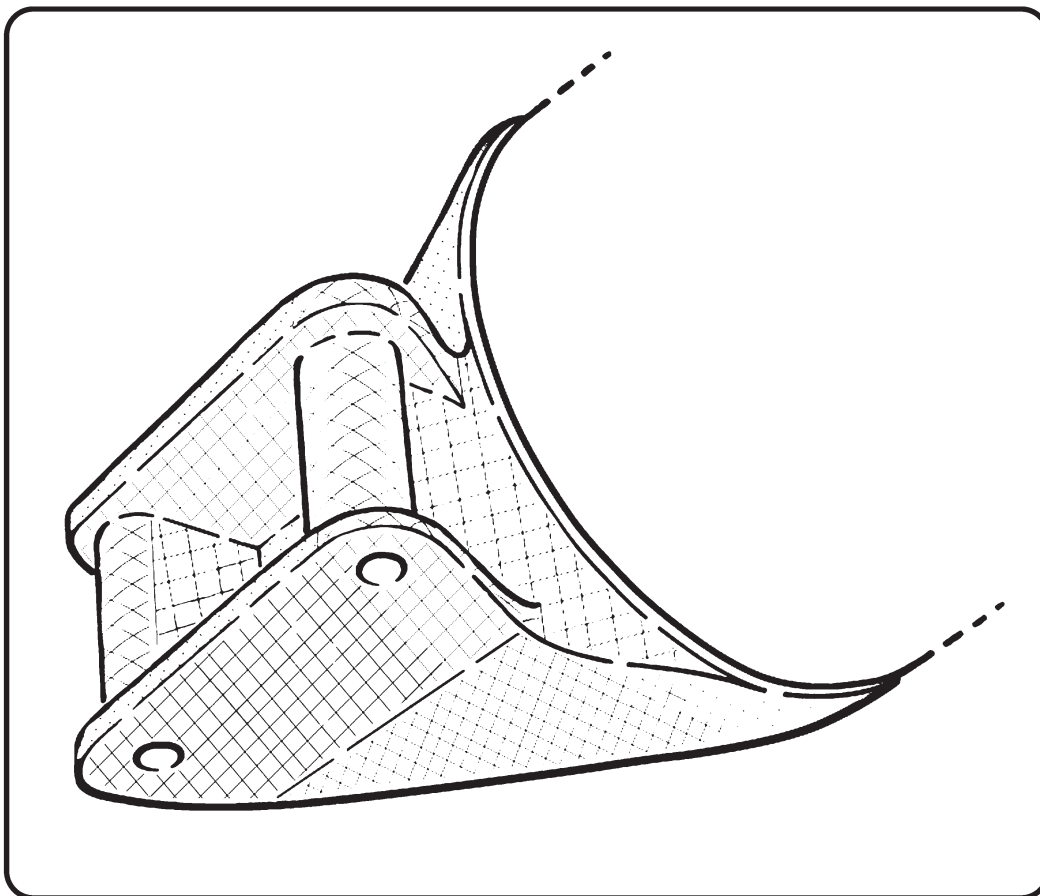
A TAILCONE CASTING BOTTOM FWD VIEW
